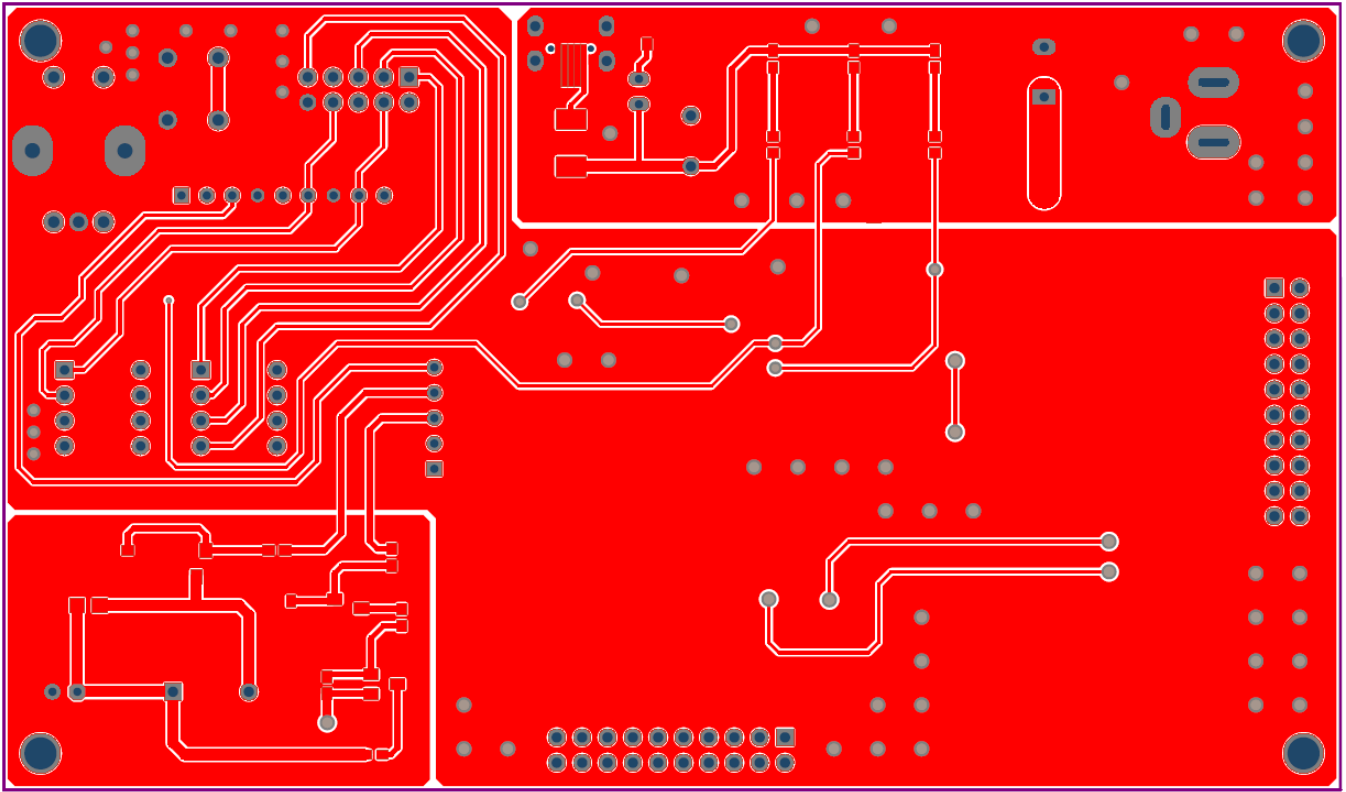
IS3XCS8977 EBGUI PCB Layout - Top Layer
